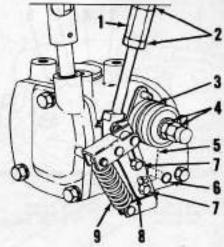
View of linkage control lever and related parts in position to adjust linkage controi lever.
